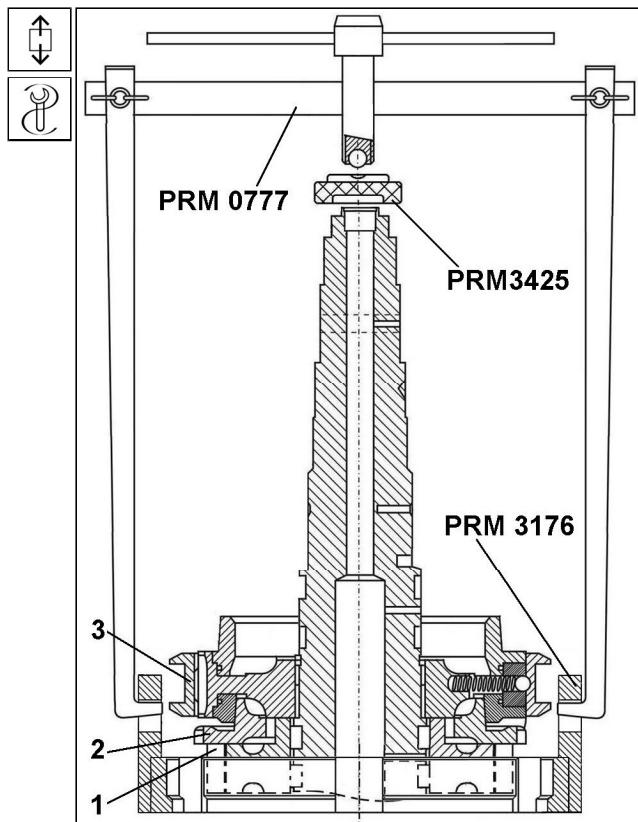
Withdrawal of the gear c/w synchromesh
